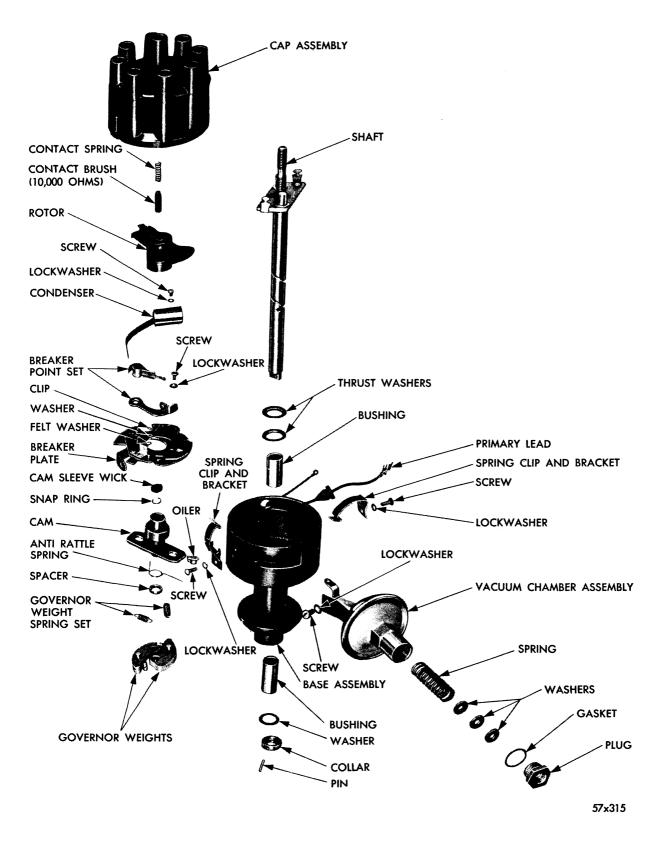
Single Point LC-1, LC-2 Distributor (Disassembled)
